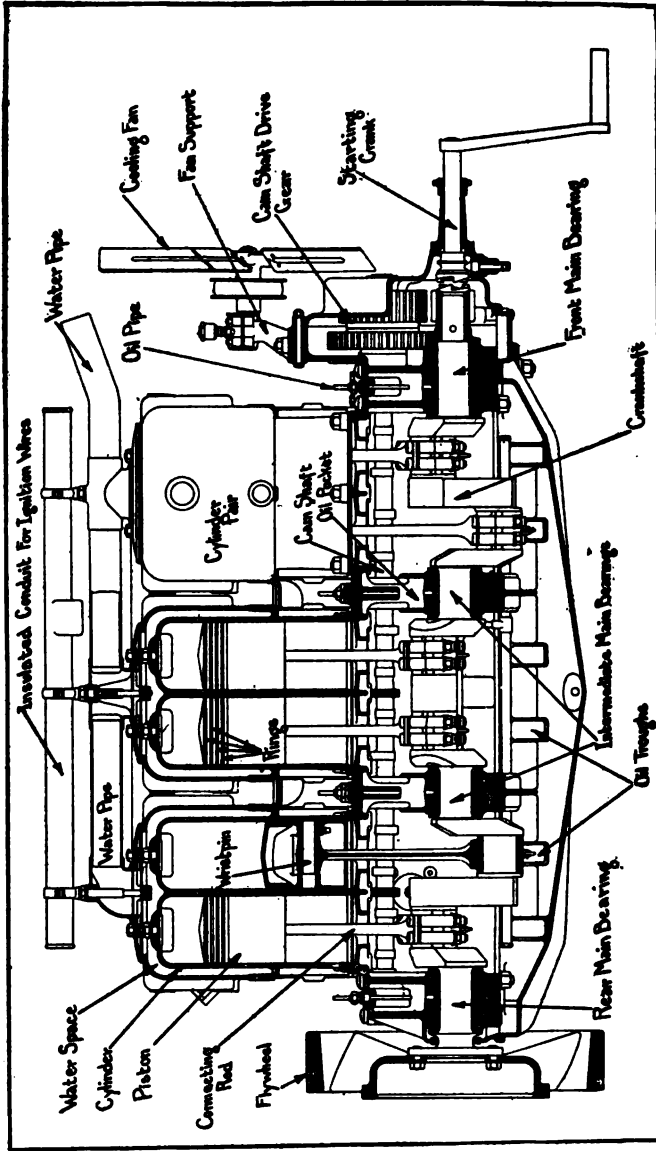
Part sectional view, showing arrangement of parts in six-cylinder automobile power plant.
